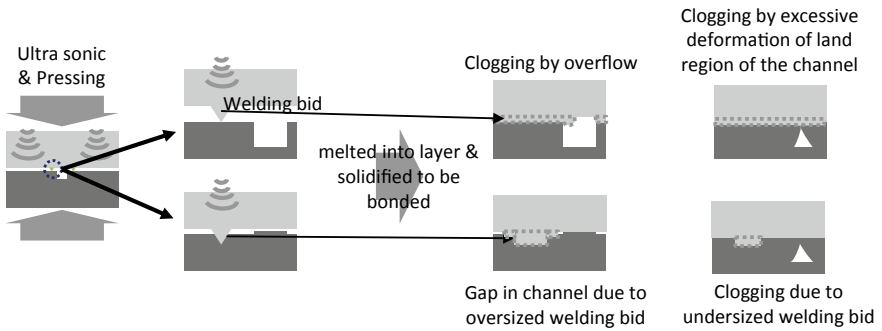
Some configurations of channel substrate and cover plate with welding bid and issues
